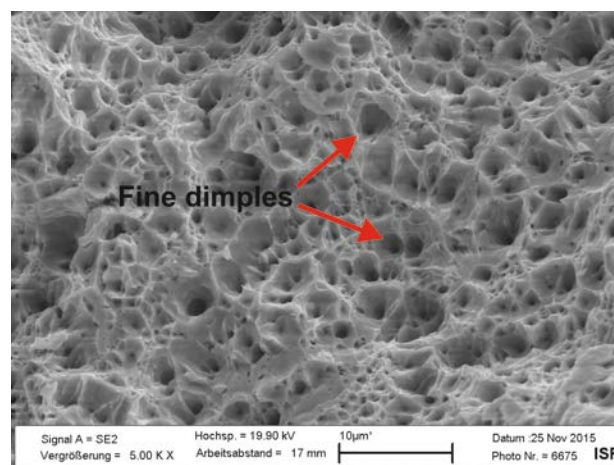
A selected SEM fractograph showing high magnification fracture surface of the tensile test specimen.
